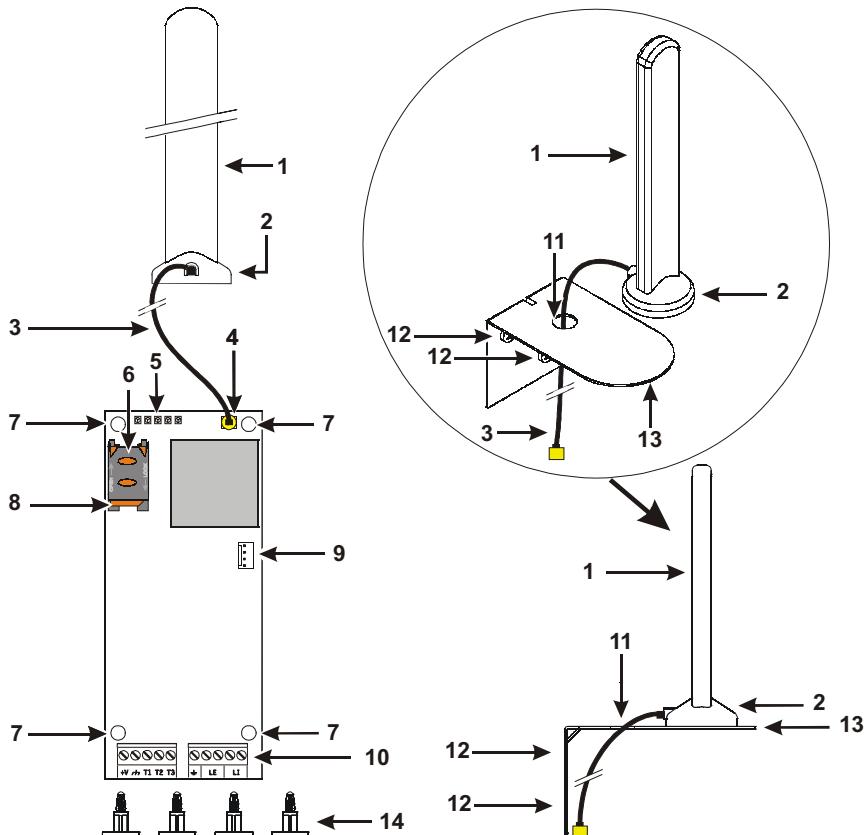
Parts - Identificación de las partes - Identificação dos componentes - Komponenter
